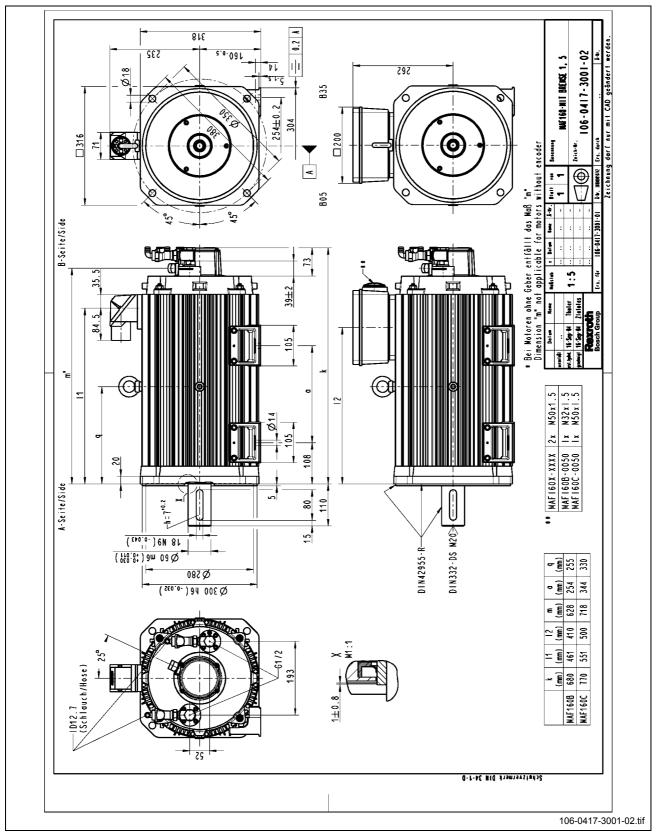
Dimension sheet for MAF160, with brakes 1 and 5
